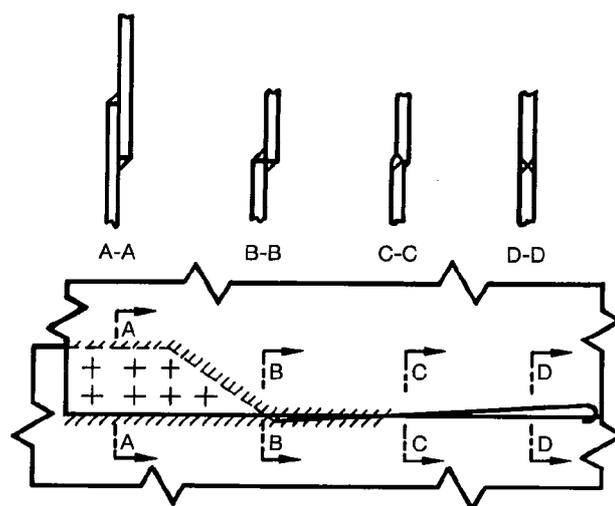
Transition From Riveting to Welding in Flush Seam
